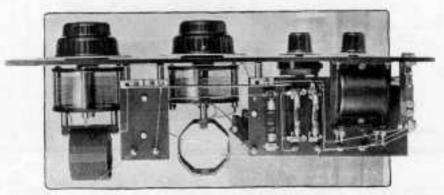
This bottom view explains the wiring as it is shown in the picture wiring diagram. Notice how short the leads have been made.
